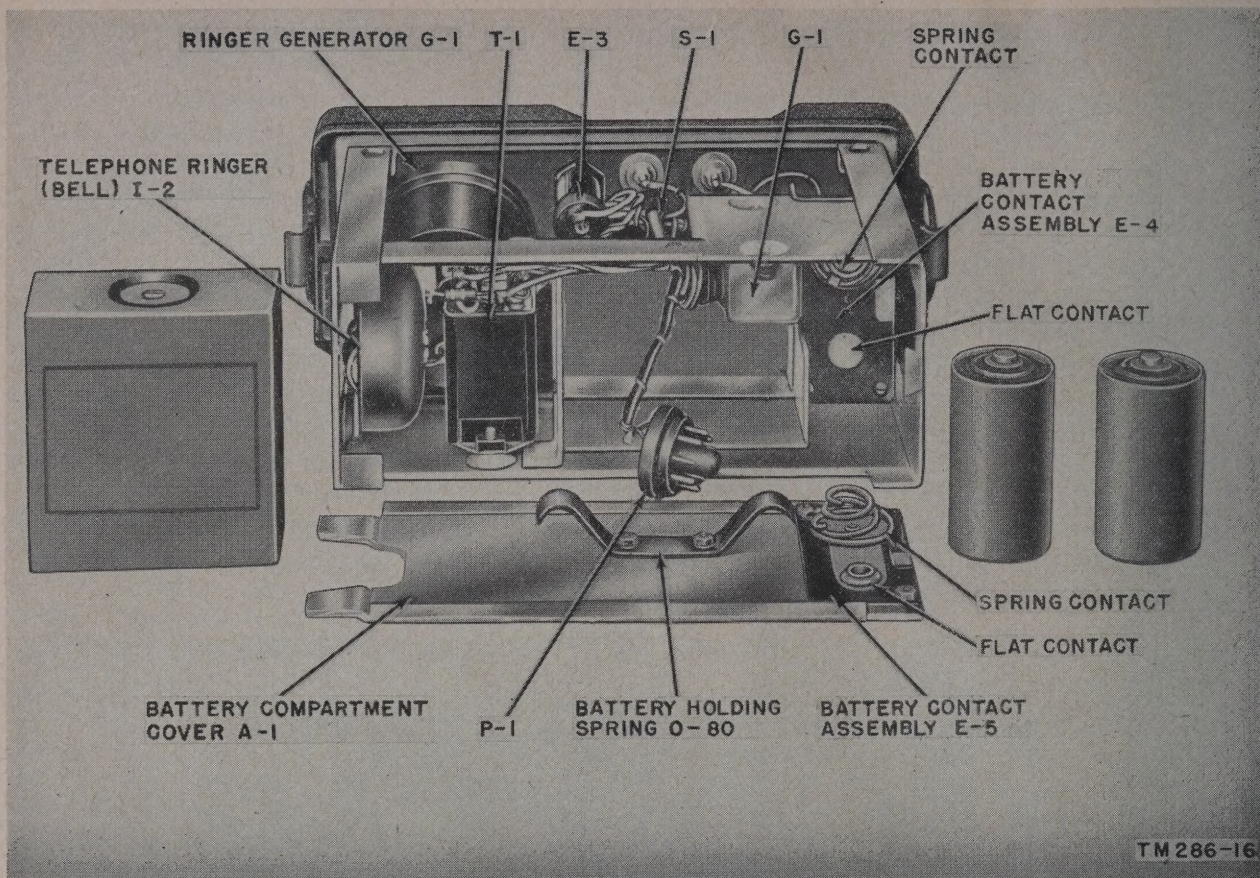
Remote Control C-433/GRC, rear view of chassis.
